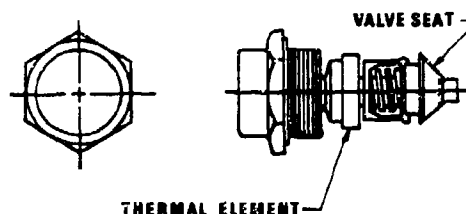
AVDS-1790 Engine Oil Cooler Thermostatic Bypass Valve
